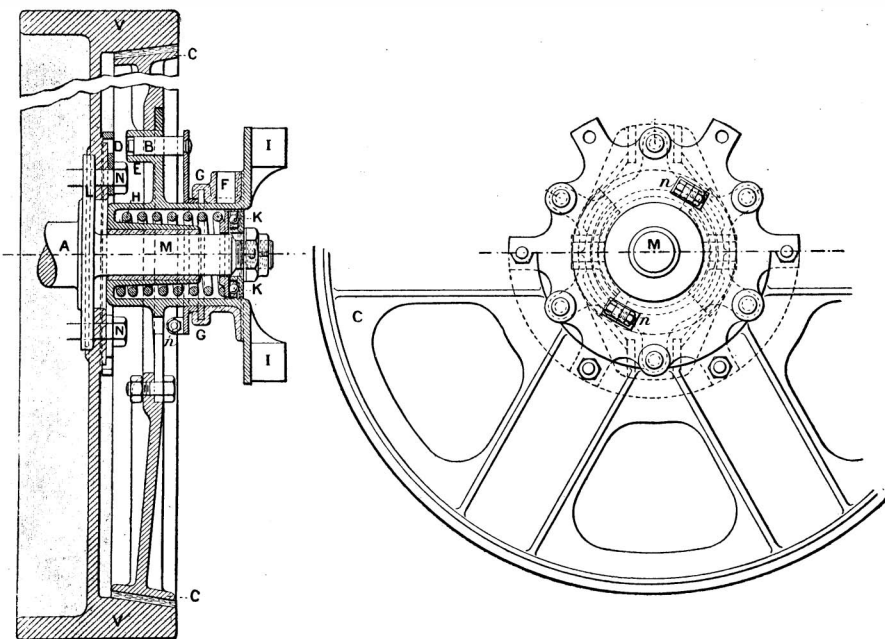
CROSS-SECTION OF FLYWHEEL CLUTCH.
